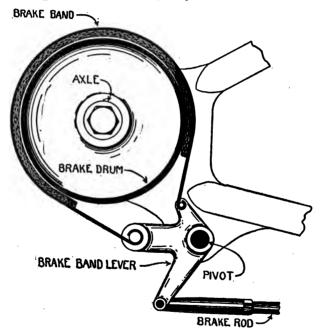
Band Brake on Motor-Cycle Wheel Hub
